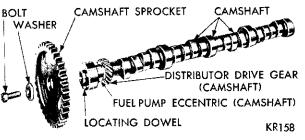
Camshaft and Sprocket Assembly (Disassembled View)
